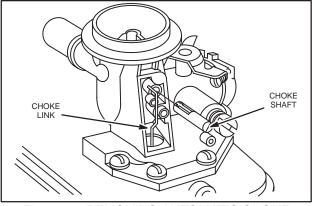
REMOVING AUTOMATIC CHOKE, TYPICAL
